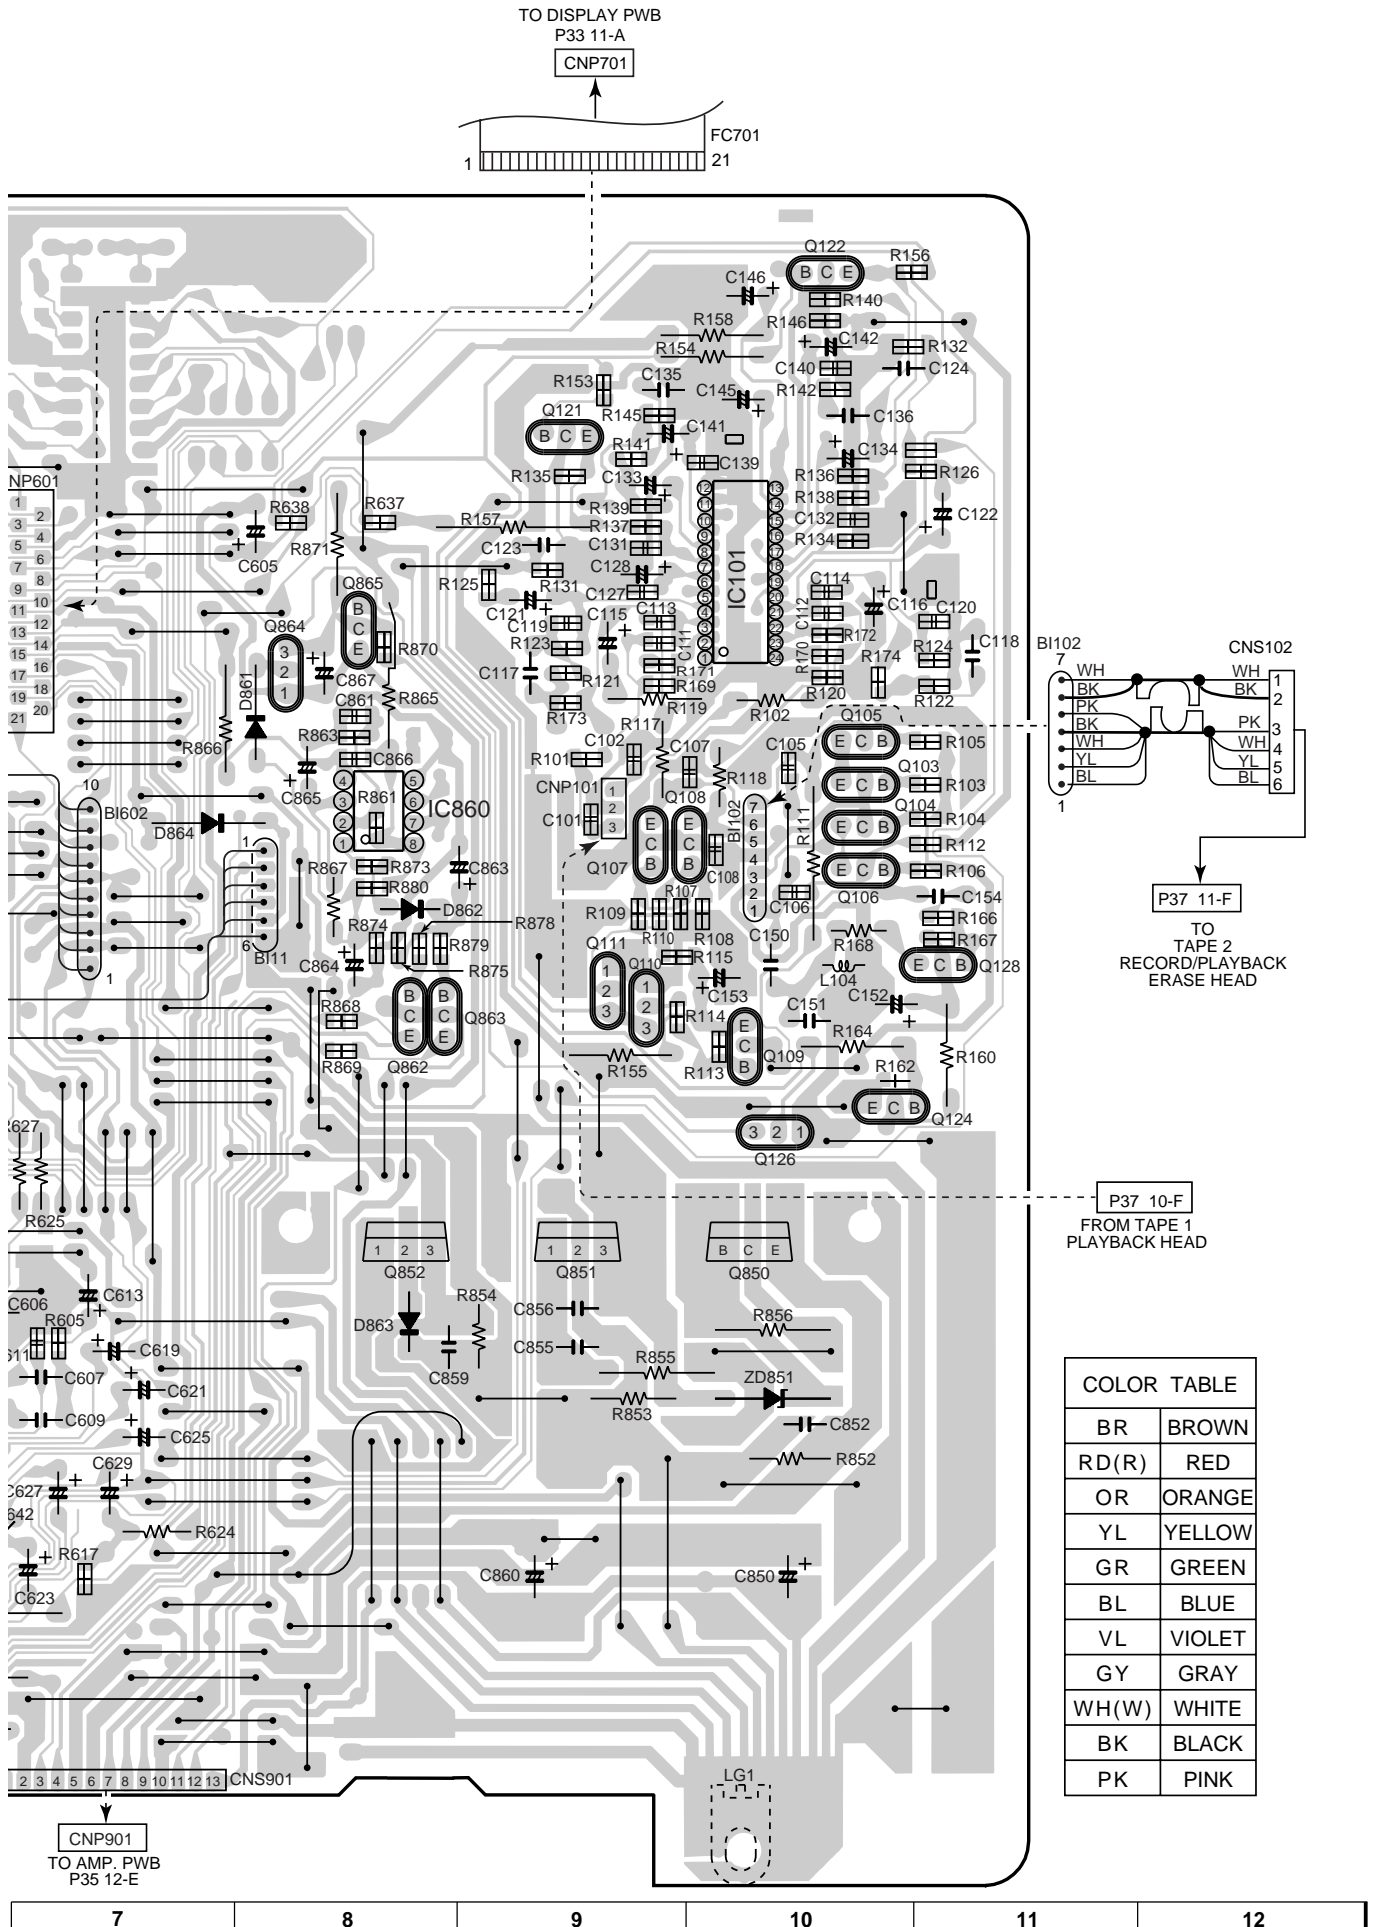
WIRING SIDE OF P.W.BOARD (3/9)
